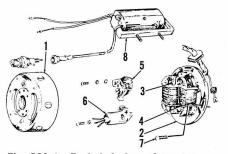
Exploded view of magneto assembly (ignition and lighting systems). Ignition timing can be changed by rotating stator plate (2) after loosening three screws (7).
